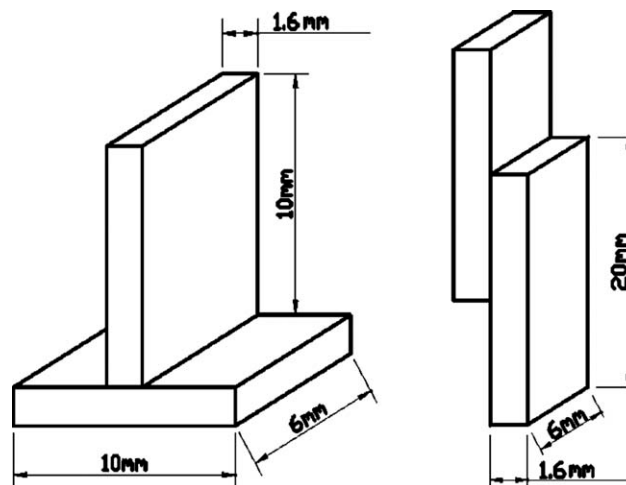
Schematic diagrams of various joints to test solvent welding: (a) tensile test; (b) shear tests.
